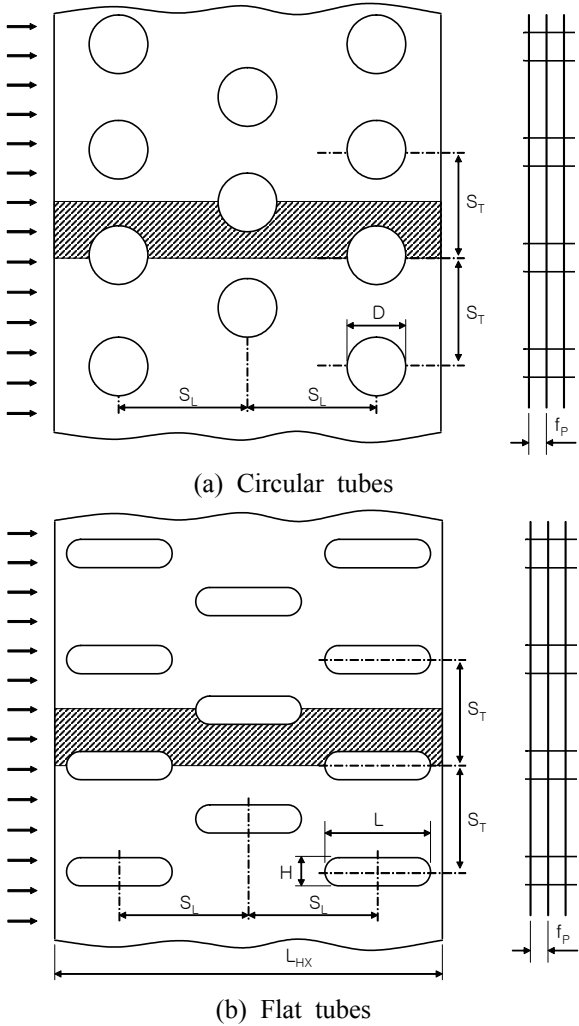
Schematic drawing of the heat exchanger with circular tubes and flat tubes-plate fins
